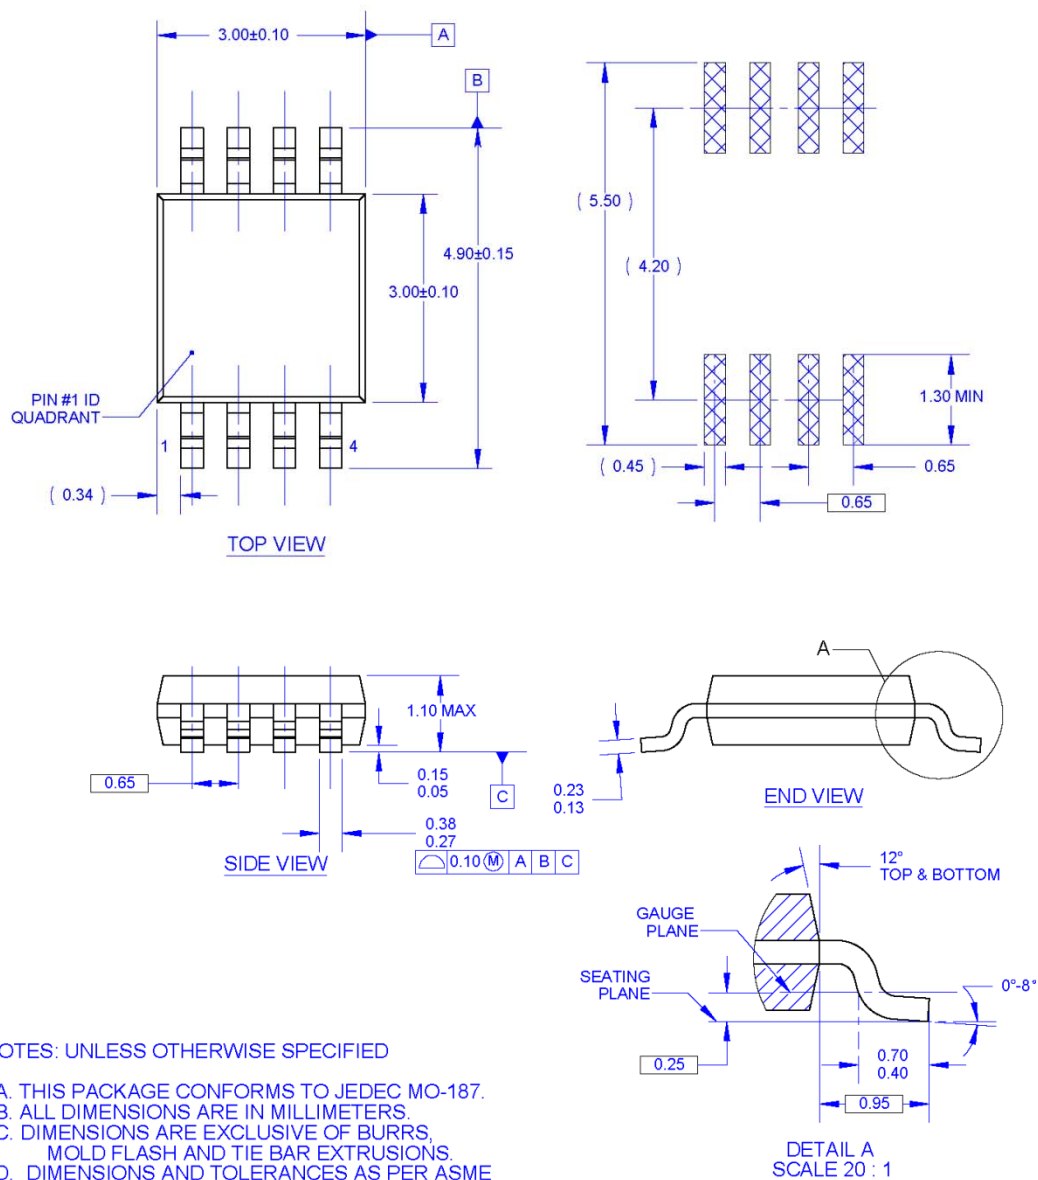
8-Lead, Molded Small-Outline Package (MSOP)
